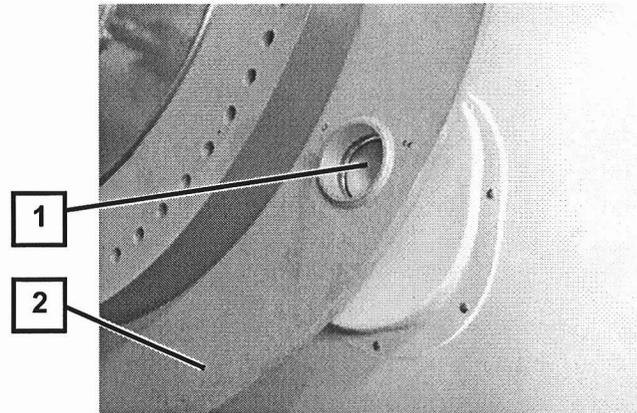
Rotor lock on rotor shaft (WTs of turbine class K08)
